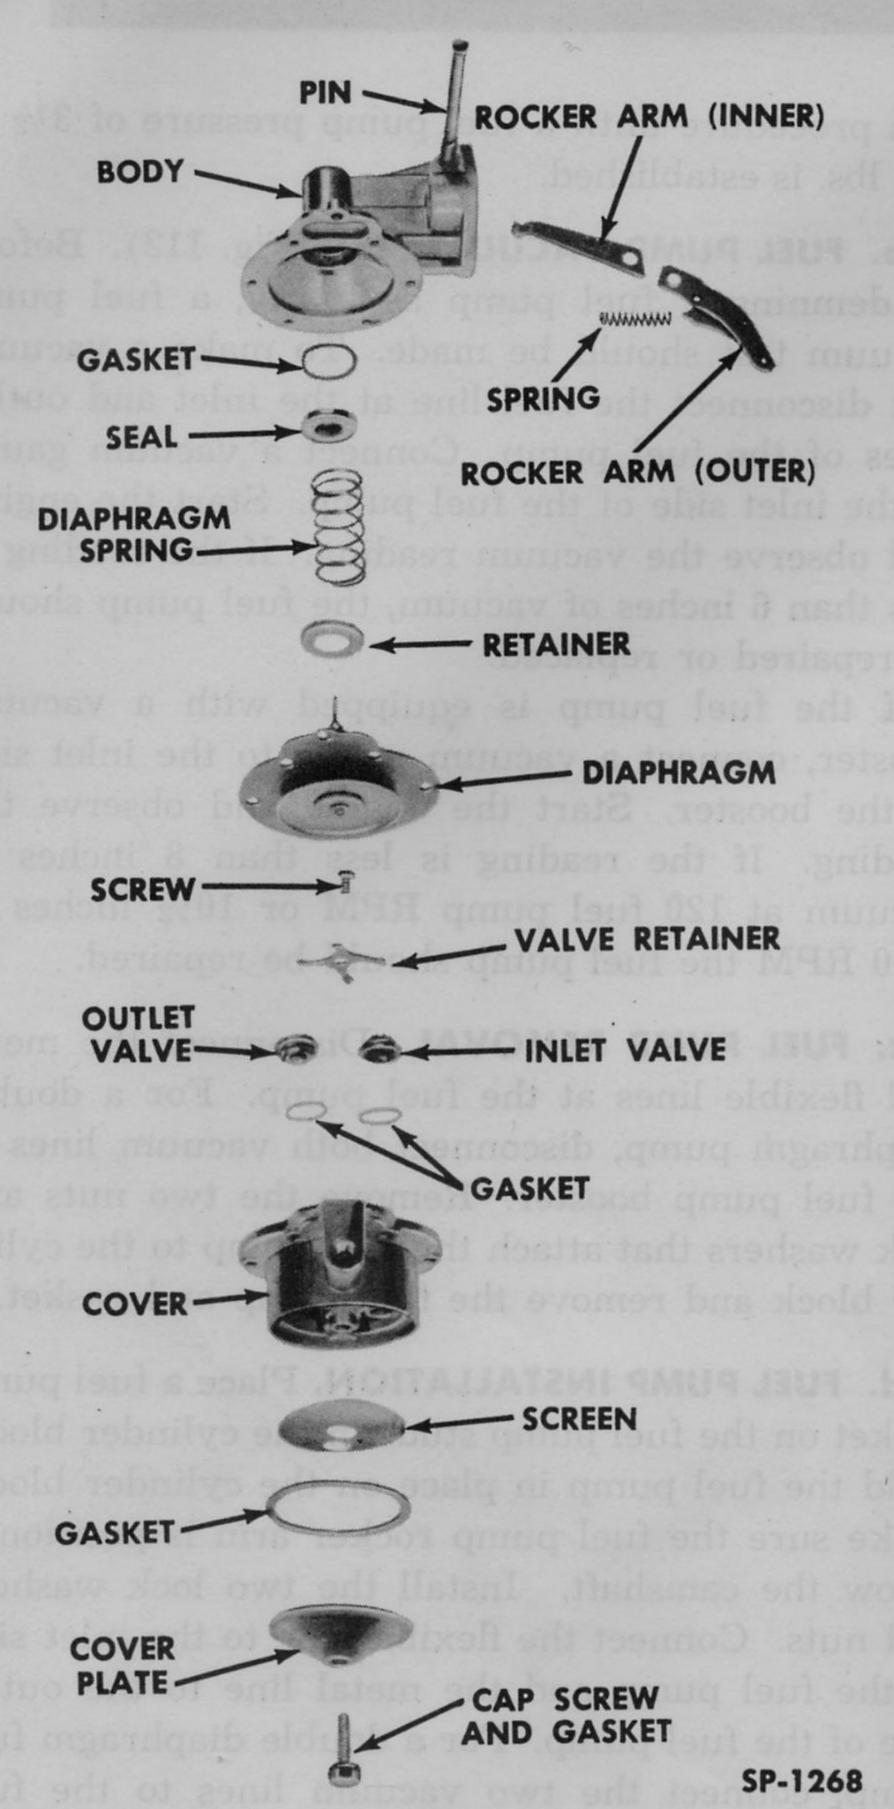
Single Diaphragm Fuel Pump—Exploded View
